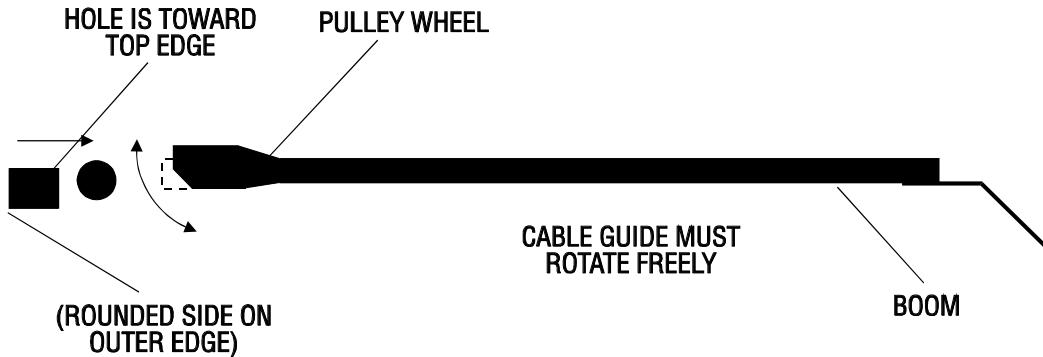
Mounting cable guide and pulley wheel to boom.
